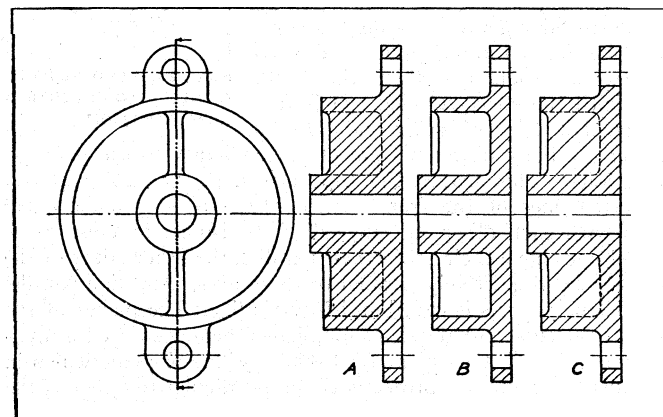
A, TRUE SECTION THROUGH A RIB; B, THE USUAL METHOD OF DRAWING SUCH SECTION; C, AN ALTERNATE METHOD
